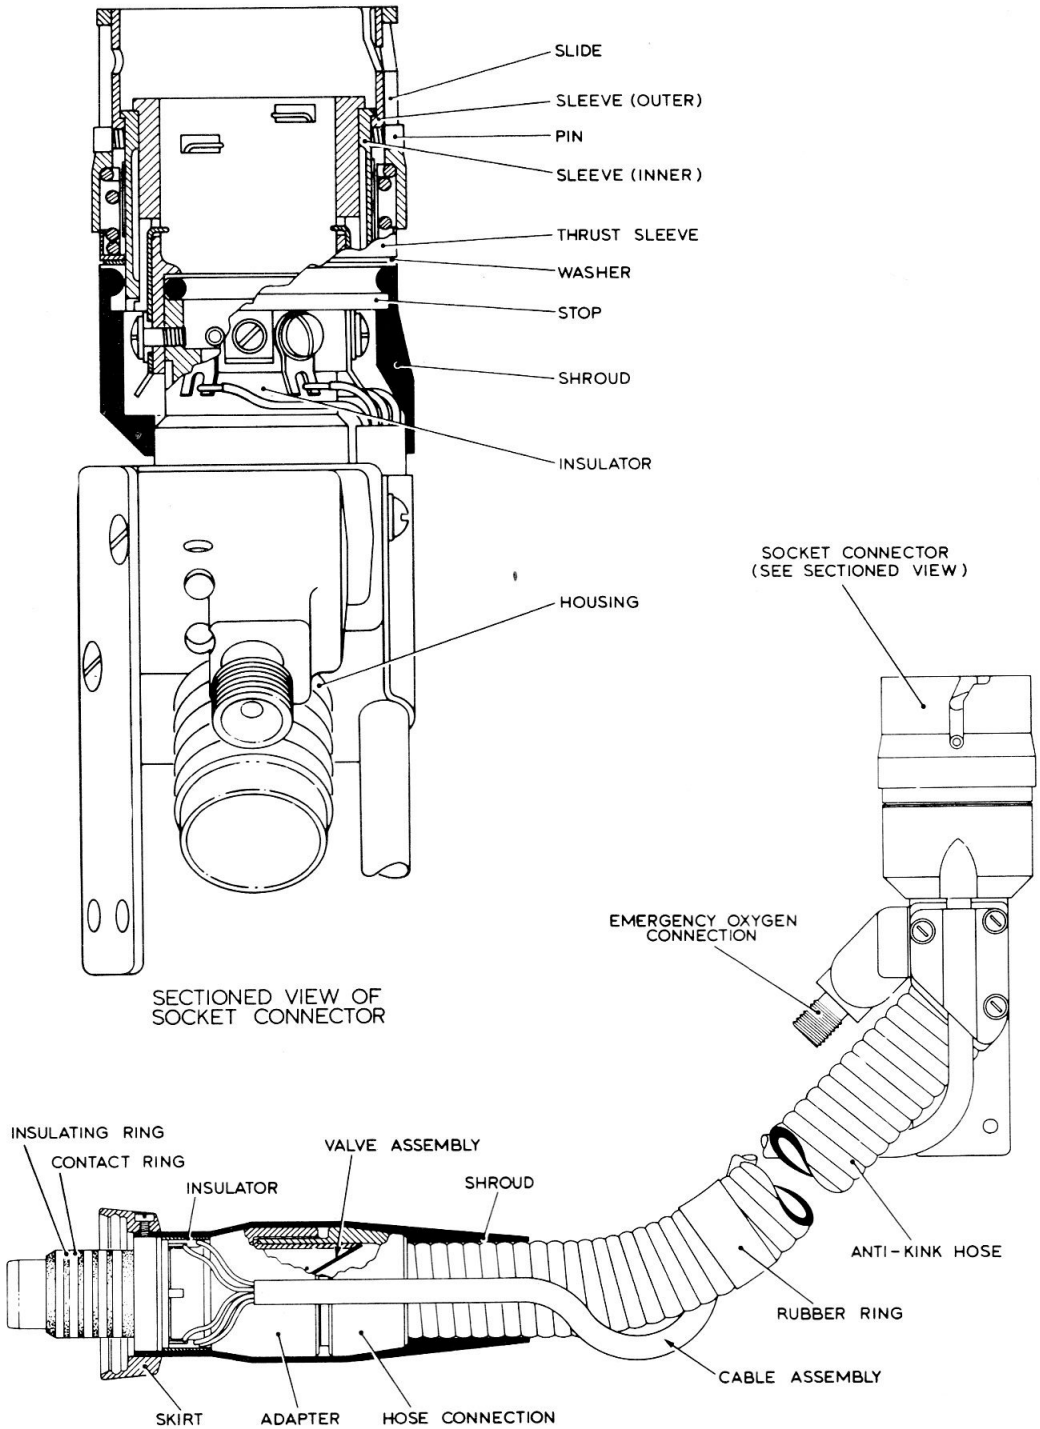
Combined oxygen and mic-tel seat hose assembly
